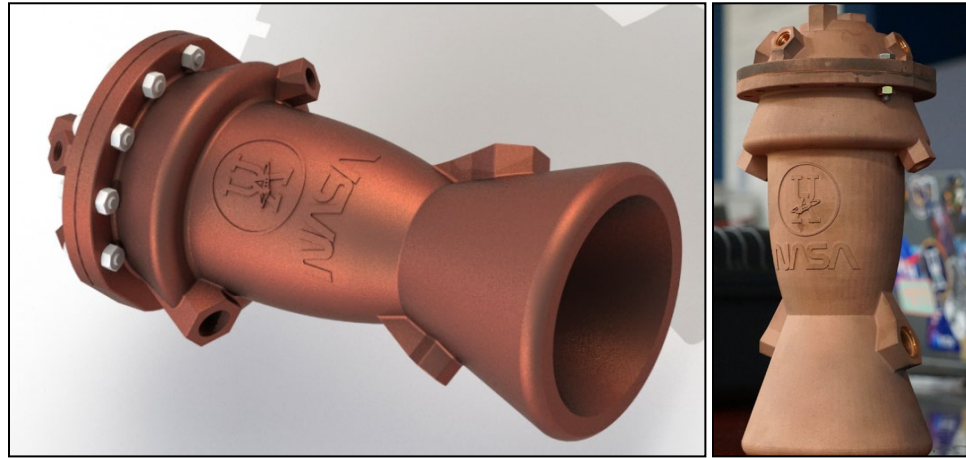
Rendering of the HORNET engine assembly (left) and finished assembly (right).
